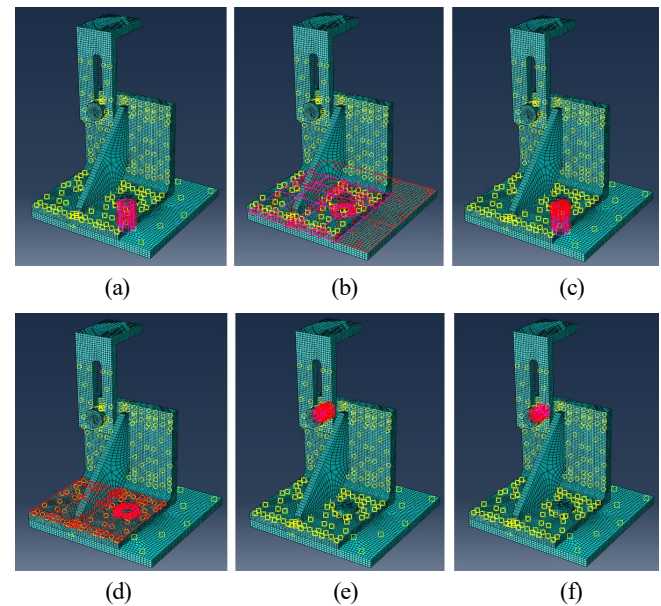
Contact conditions (BTST-5600): (a) Base & fixing bolt, (b) base & bracket, (c) bracket & fixing bolt, (d) bracket & fixing bolthead, (e) bracket & assembly bolt, (f) stopper & assembly bolt.
